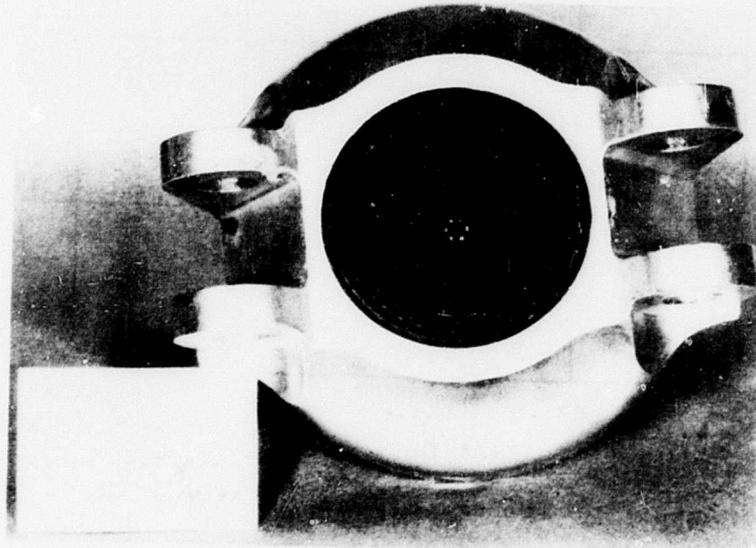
Outboard View of Test Sample 8 After Completion of Axial Fatigue Test.
